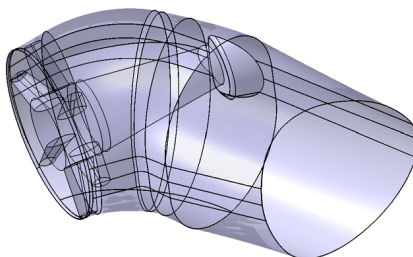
Geometrical model of the exhaust pipe of the TV3-117 engine
